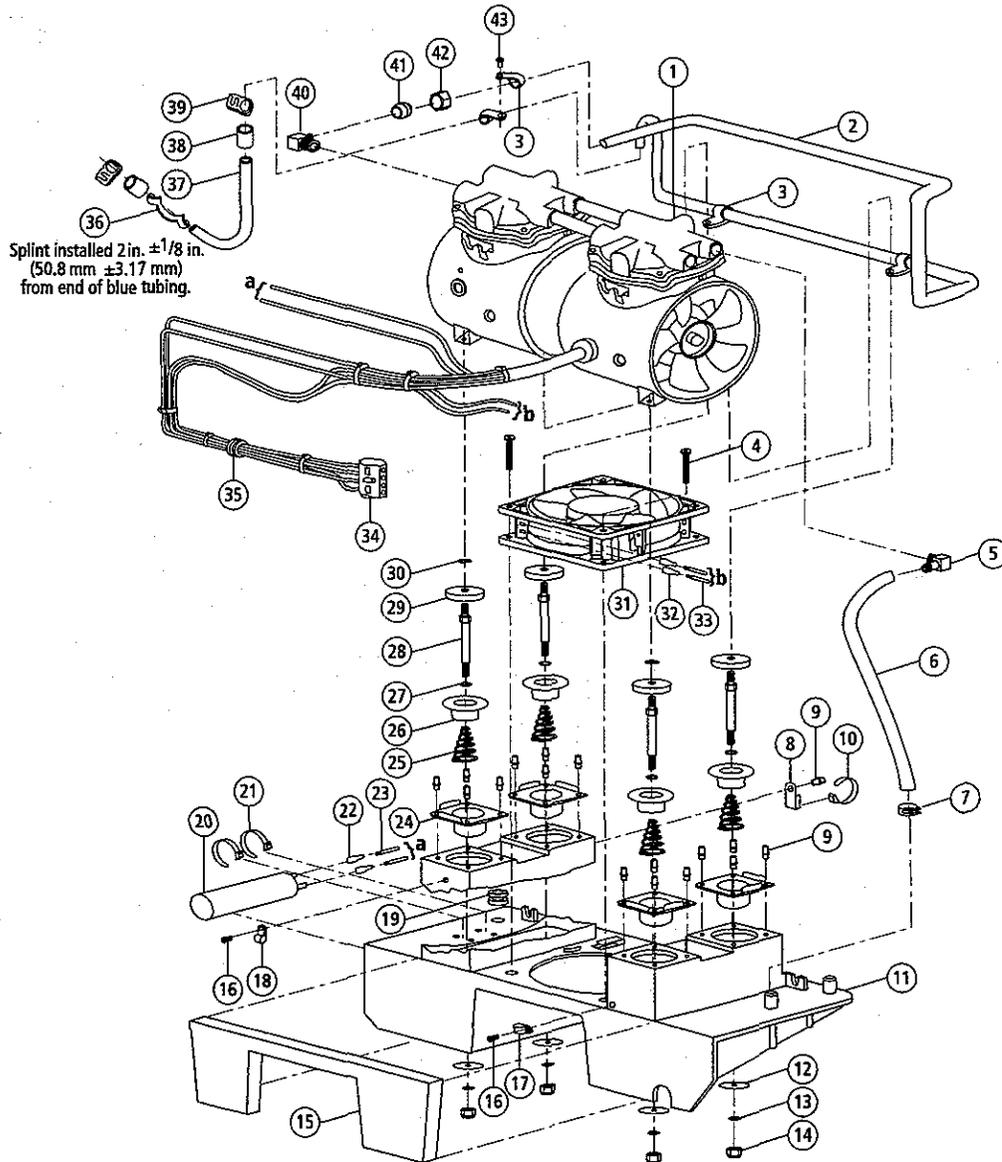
2619 Thomas Compressor Platform Assembly, Drawing B
